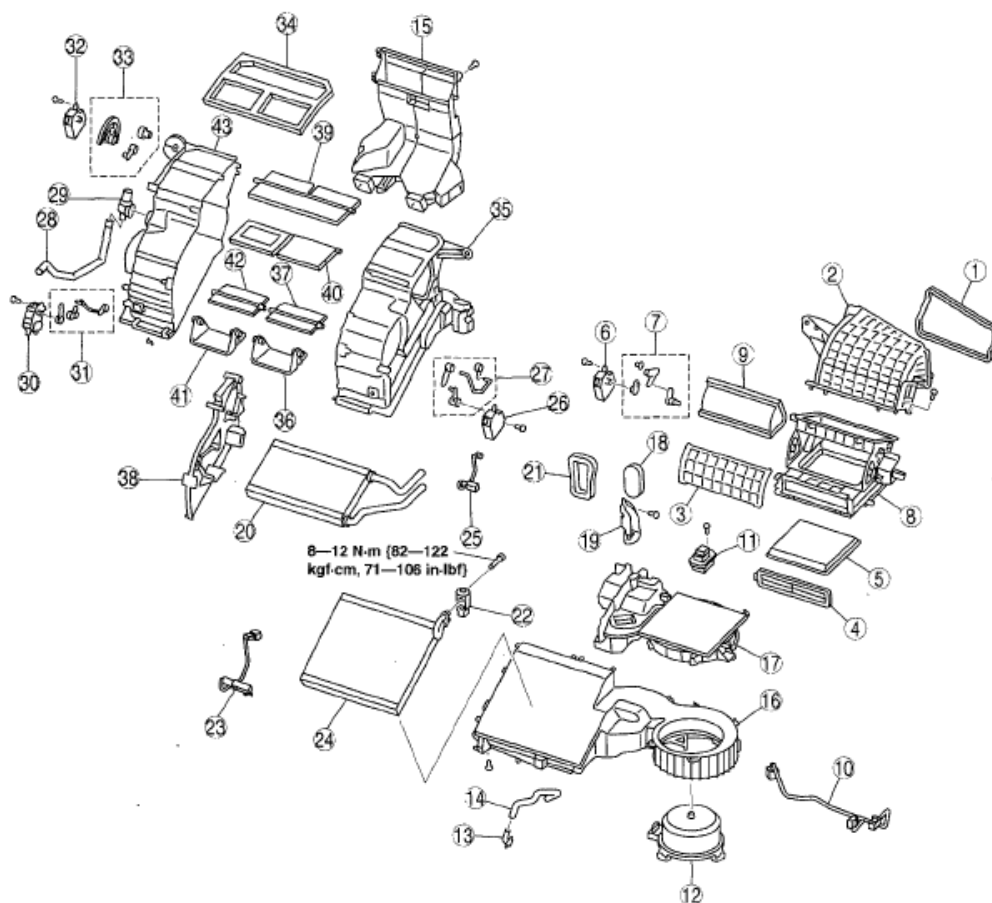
Identifying Front A/C Unit Nuts & Torque Specifications
